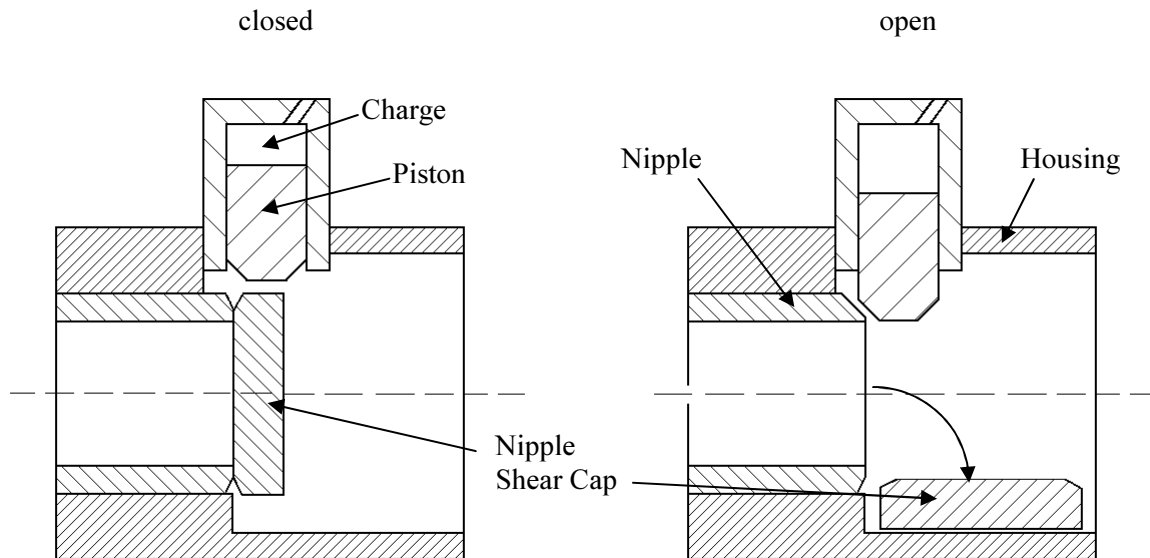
Explosively Opening Squib Valve (principle sketch)
